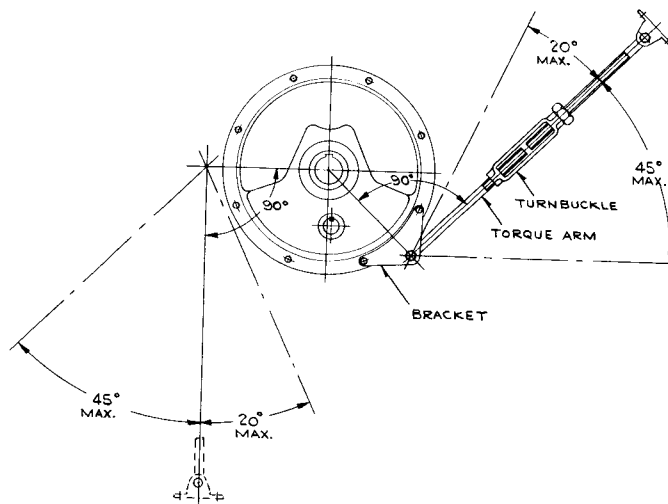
Shaft Mounted Unit - Torque Arm and Bracket Location
